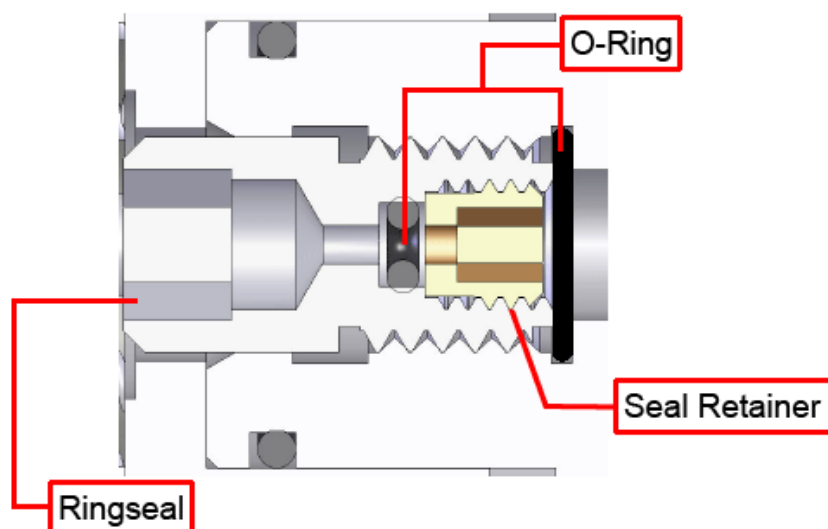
Cross-Section View of Ringseal Showing O-Ring
